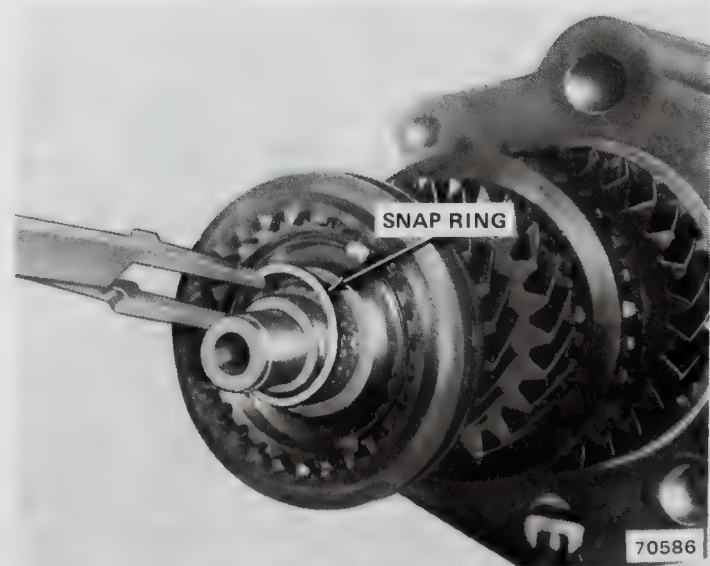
B-58 Output Shaft Front Snap Ring Removal/Installation
